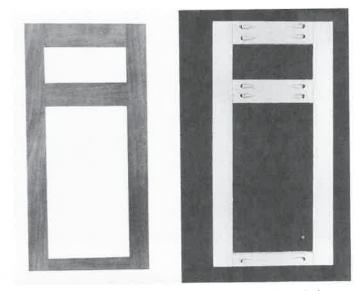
This is a laminated particleboard frame assembled with pocket joints. (*Evans Rotork*)
